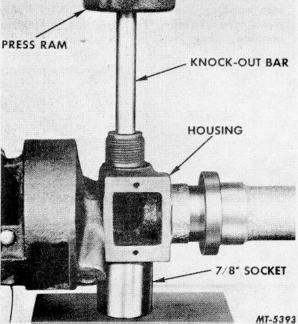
Pressing Out Tachometer Drive Bushing Using Knock-Out Bar
